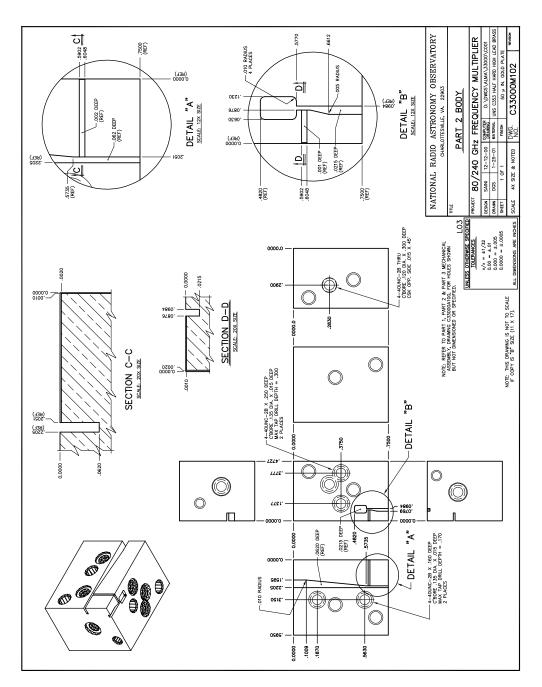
80/240 GHz frequency tripler, version 1: Mechanical details of part 2 of the three piece metal block.
